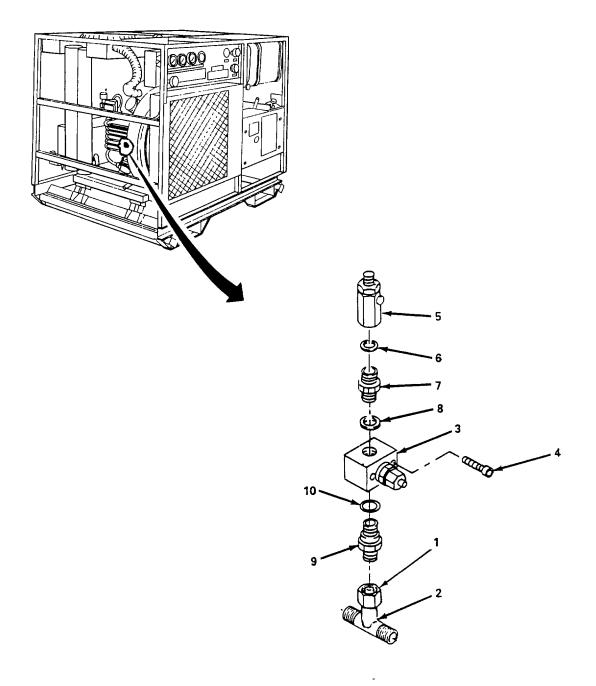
Manifold and Safety Valve (1st Stage), Replace.
